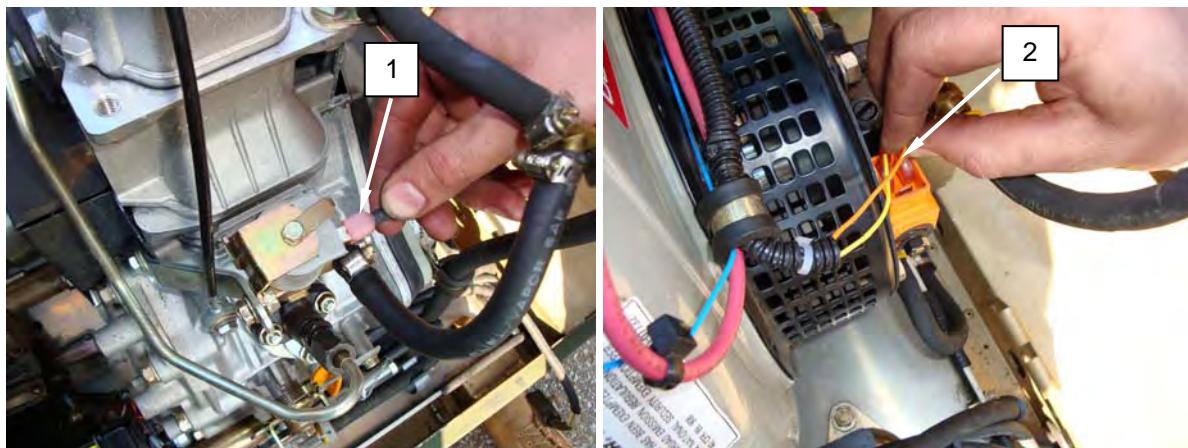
Connect Wires to Engine Shutdown and Burner Fuel Pump Solenoid.
